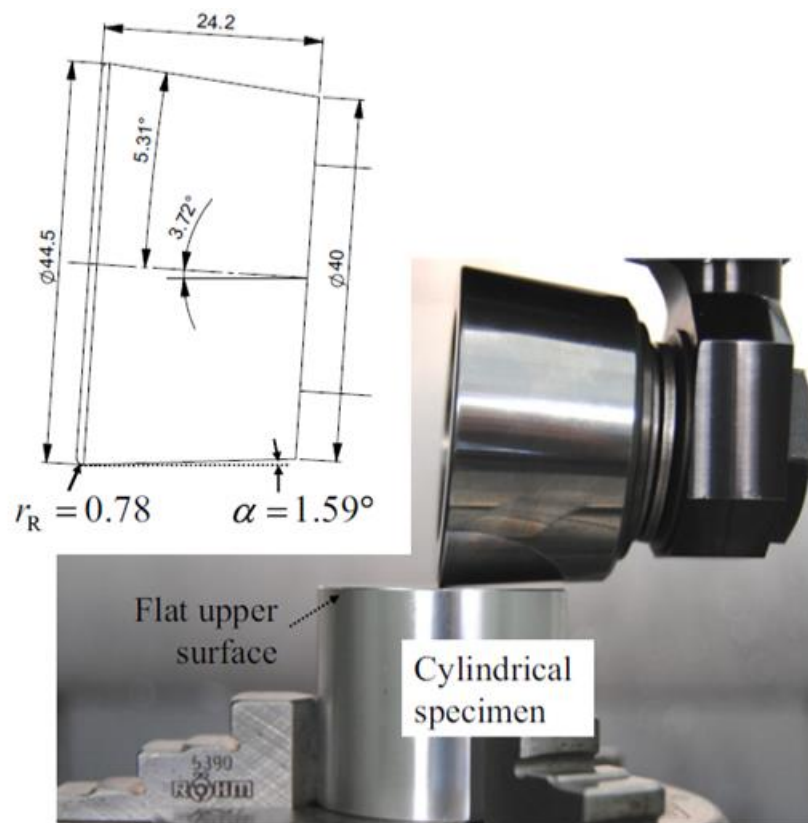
Tool & Specimen Geometry for 2D Analysis [4]
